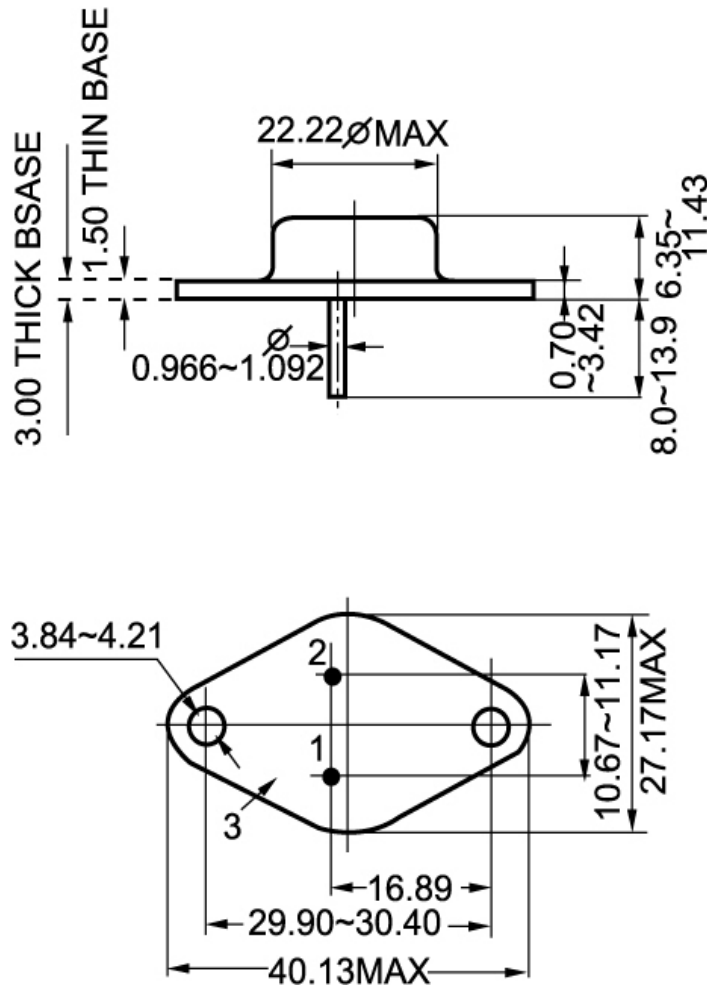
Outline dimensions (unindicated tolerance:±0.50 mm)
